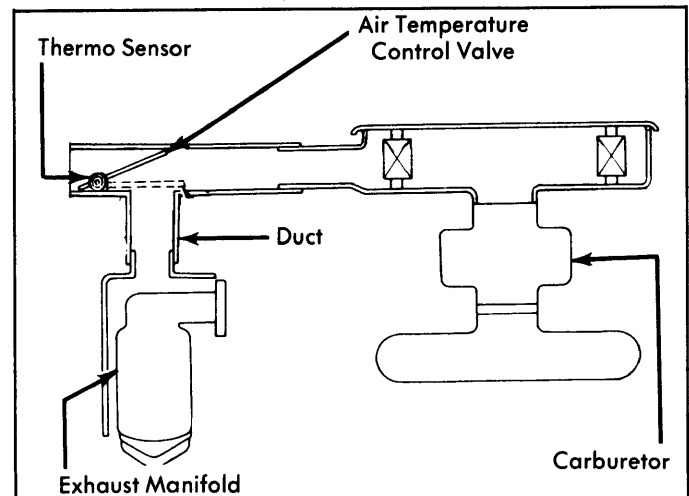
Thermostatic Air Cleaner Assembly (Automatic)
